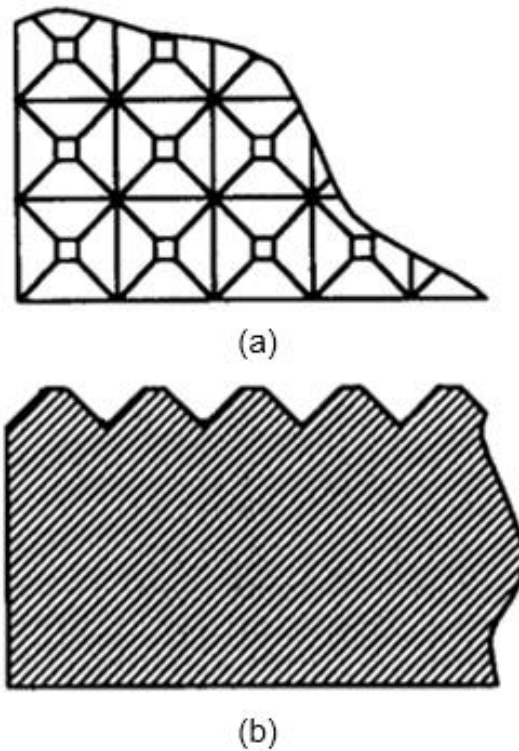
a) Top view of milled pyramid-shaped pattern. b) Side cross-section view of pyramid-shaped pattern [17].
